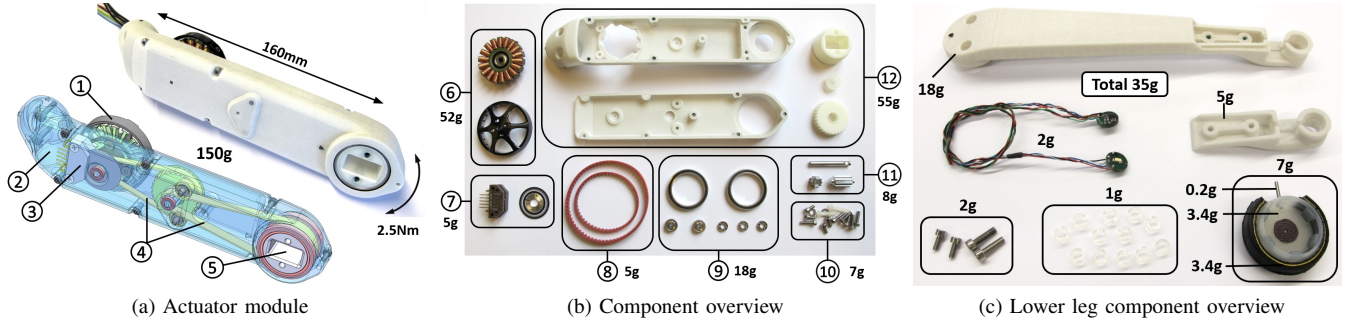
Brushless actuator module (a) assembled, and (b) individual parts. BLDC motor ①, two-part 3D printed shell structure ②, high resolution encoder ③, timing belts ④, and output shaft ⑤. Brushless motor ⑥, optical encoder ⑦, timing belts ⑧, bearings ⑨, fasteners ⑩, machined parts ⑪ and 3D printed parts ⑫. With the exception of ⑪, all parts are either off-the-shelf, or printable on a regular 3D printer. The motor shaft and the pulleys ⑪ can be machined from stock material. (c) Lower leg and foot contact switch components.
